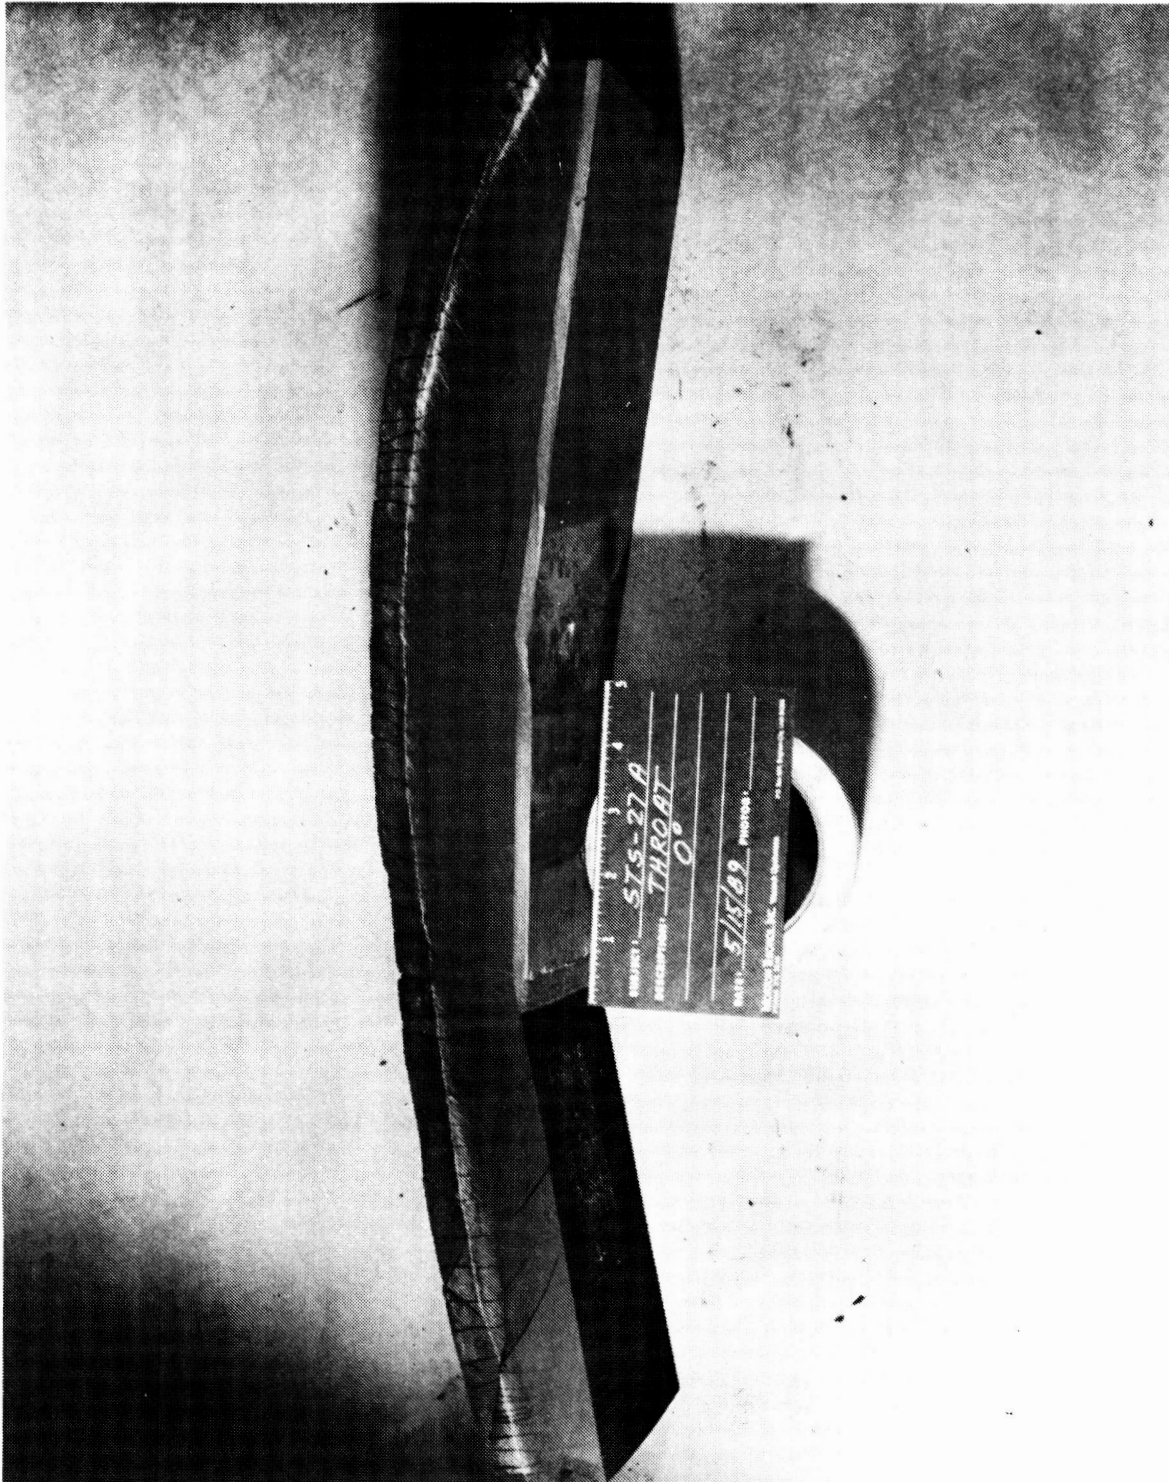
STS-27A Throat and Throat Inlet Rings Sectioned View
